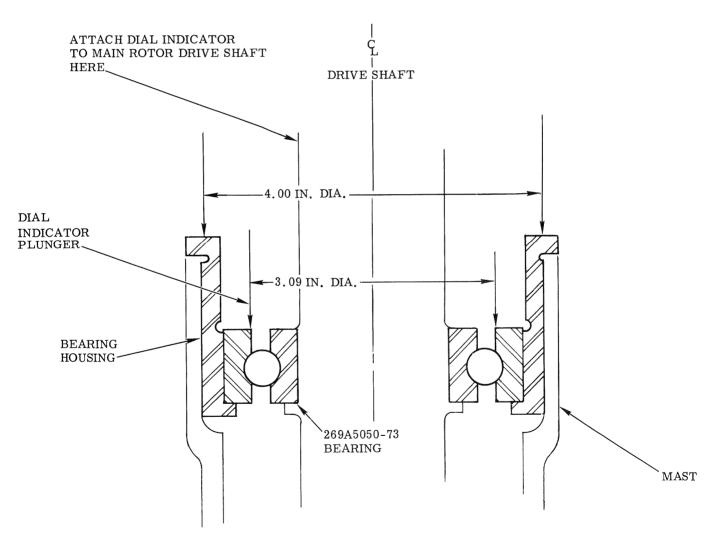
TIR CHECK - MAIN ROTOR THRUST BEARING
